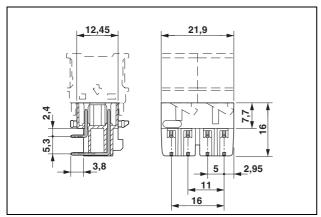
Dimensions of header HSCH 2,5-2U/ 8 9005
